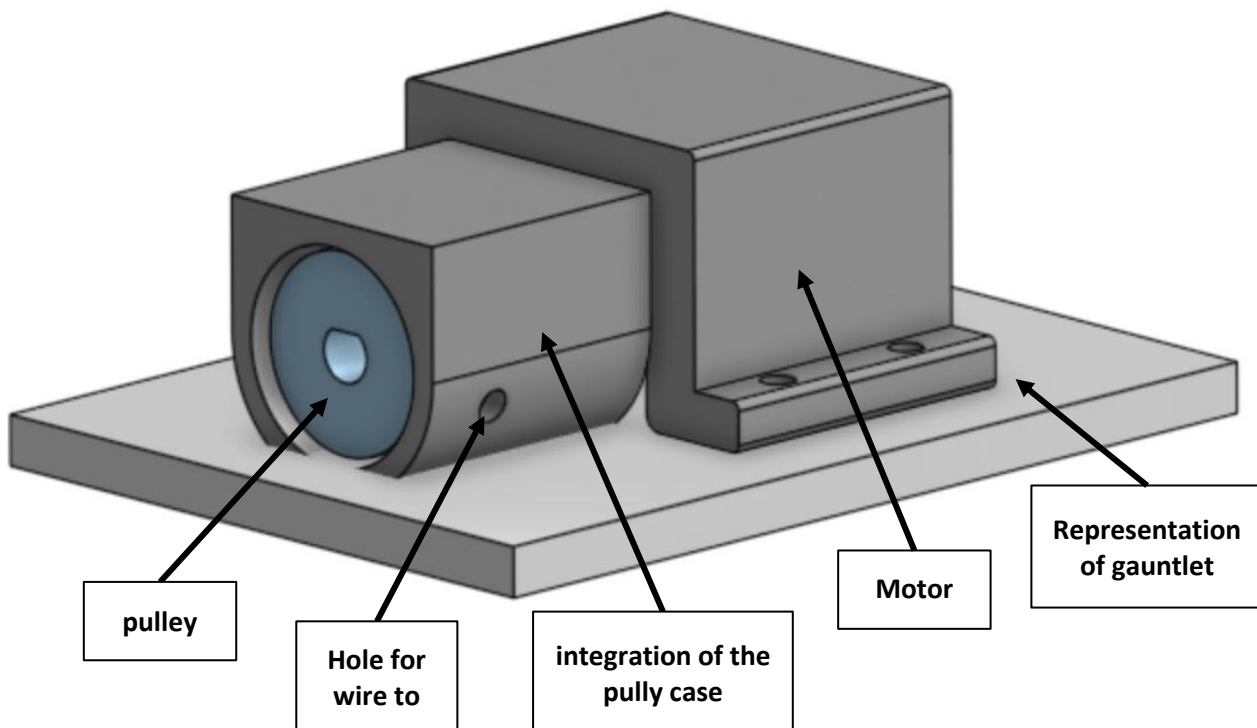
shows the extension of the motor casing to have a case for the pulley
